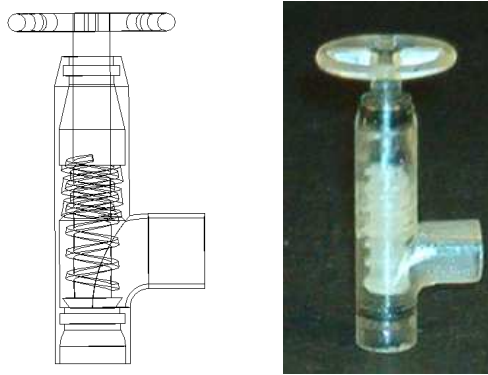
Wire-frame rendering (left) and finished prototype (right) of the downsized valve
